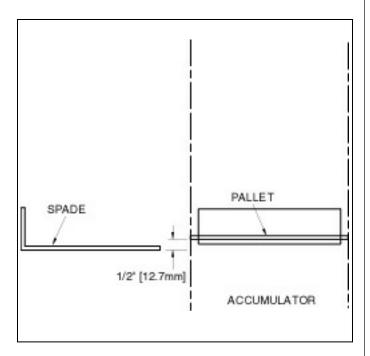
SWITCH LS-24 ADJUSTMENT.
